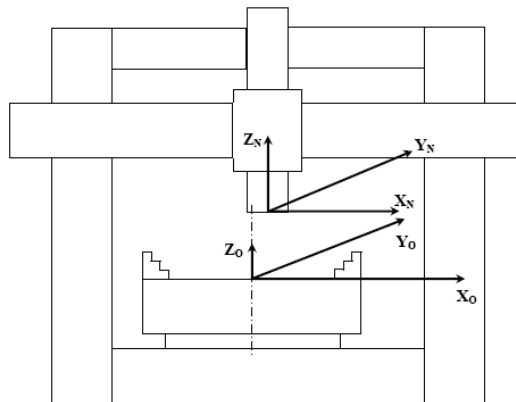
Tool and workpiece coordinate systems at a vertical lathe-type machining centre
